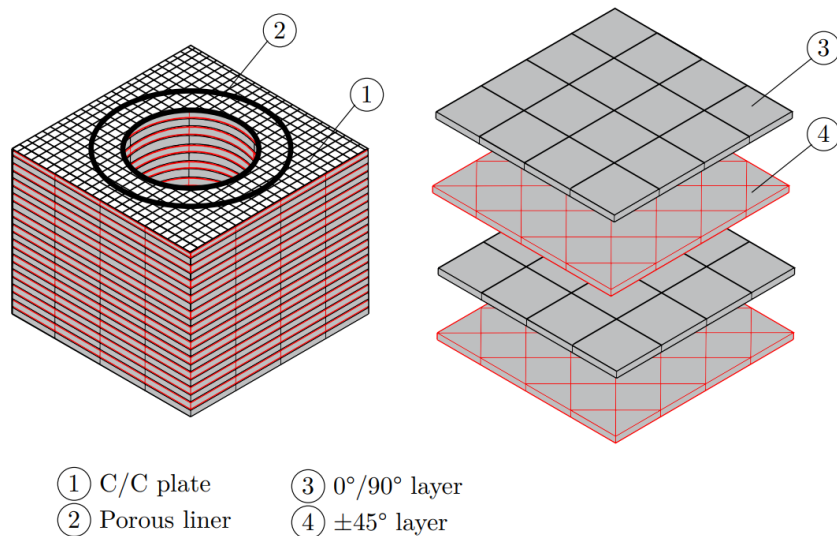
Schematic of the orthotropic layered CMC-Structure of a journal bearing [17]
